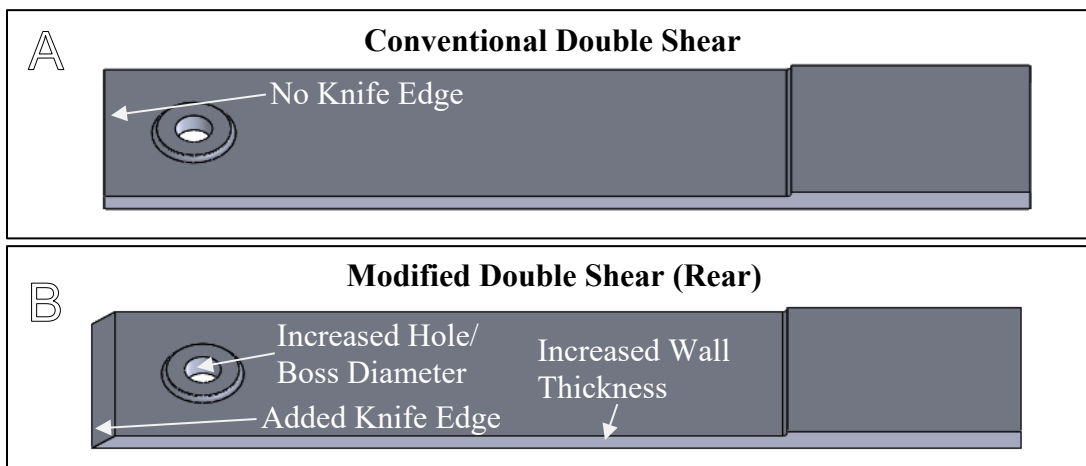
Double Shear Test Fixtures A) Conventional B) Updated
